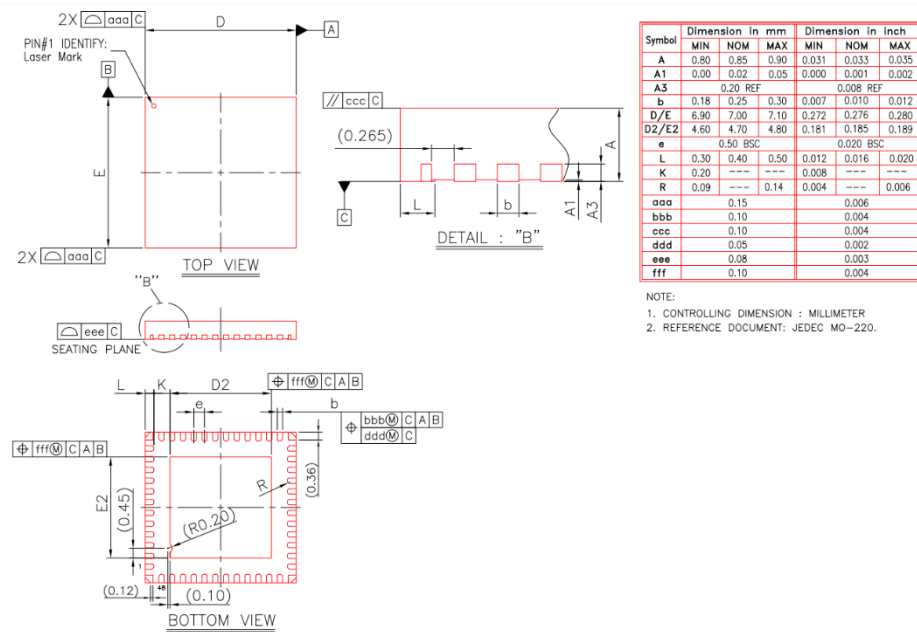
XS8001-T/XS8001-T QFN-48 Package Outline
